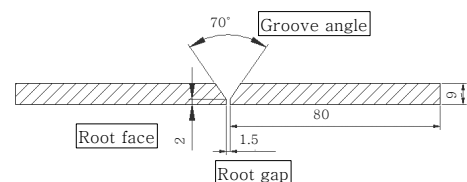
Configuration of butt welding specimen (250×80×9mm)
